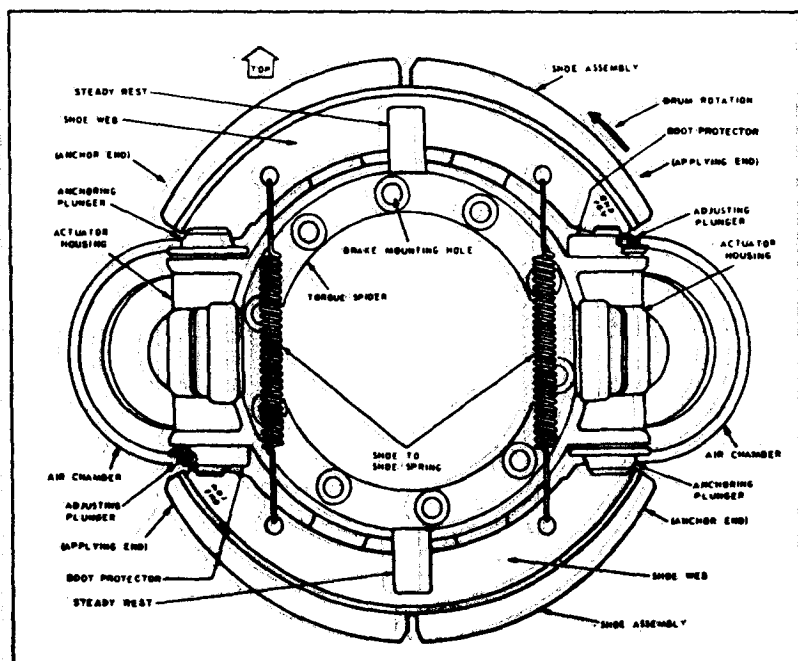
FRONT & REAR BENDIX TWINPLEX WEDGE BRAKE
